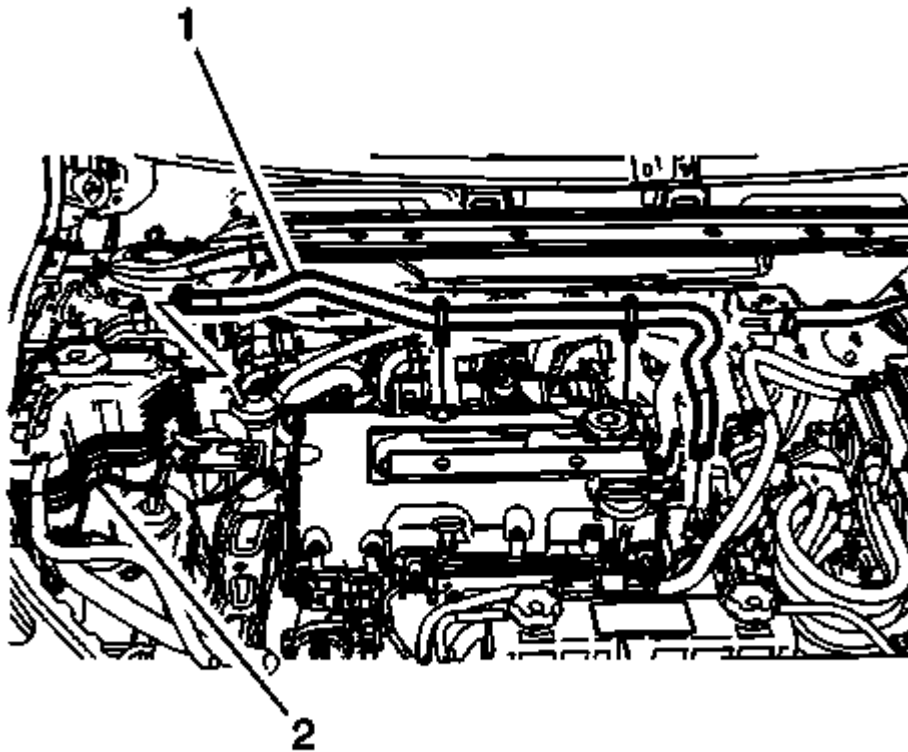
Heater Outlet Hose Vapor Vent Hose
